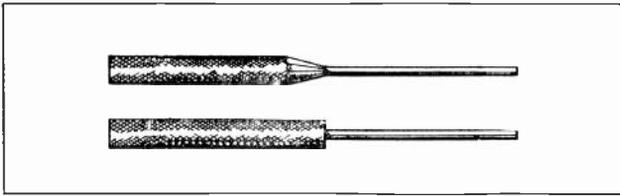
This sketch shows the proper method of stripping the insulation from a wire in the upper view. The lower view shows the wrong way.
